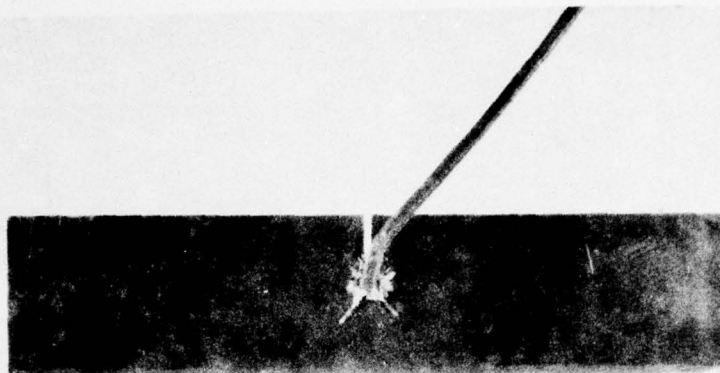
Dynamic tear specimen with iron-constantan thermocouple spot welded across the notch root.
